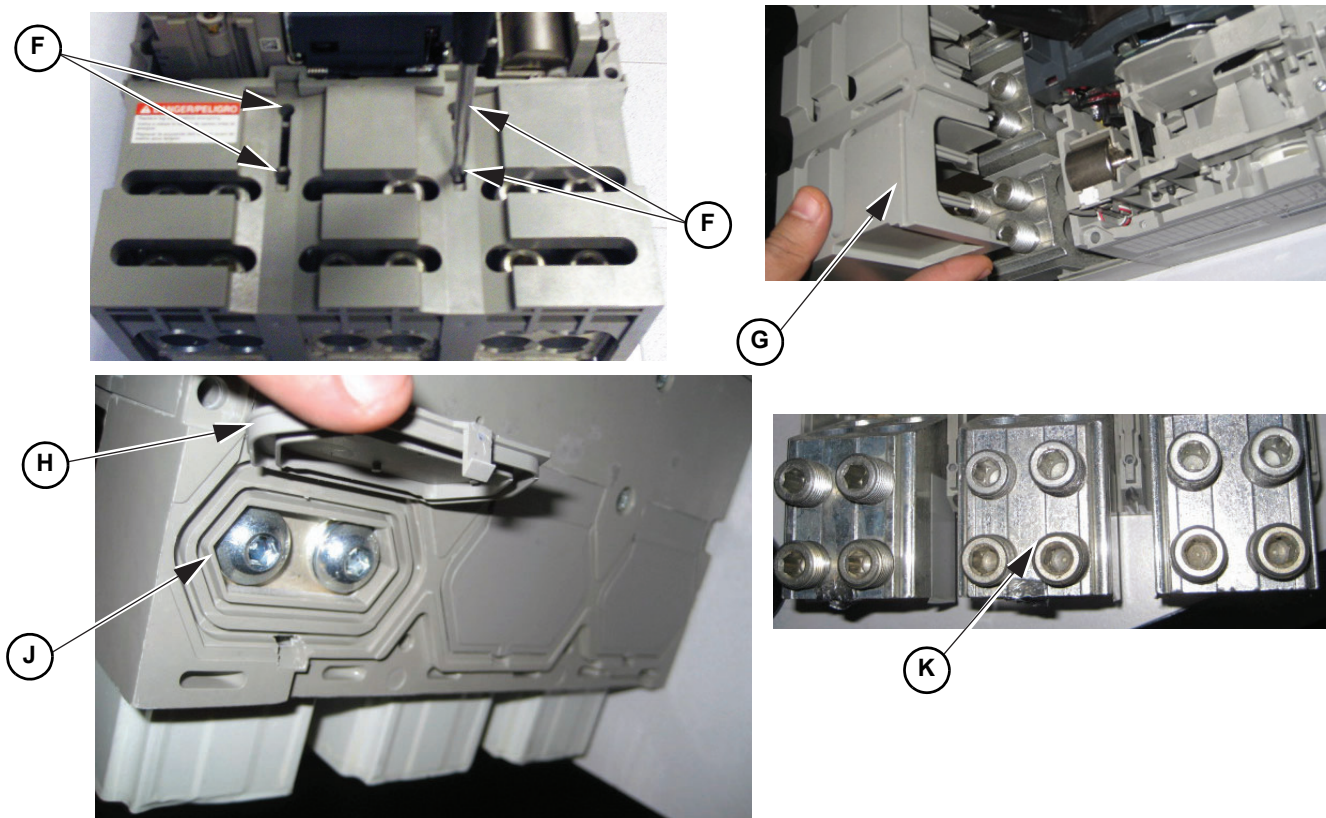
Removing Neutral Lugs and Mounting Screws /
